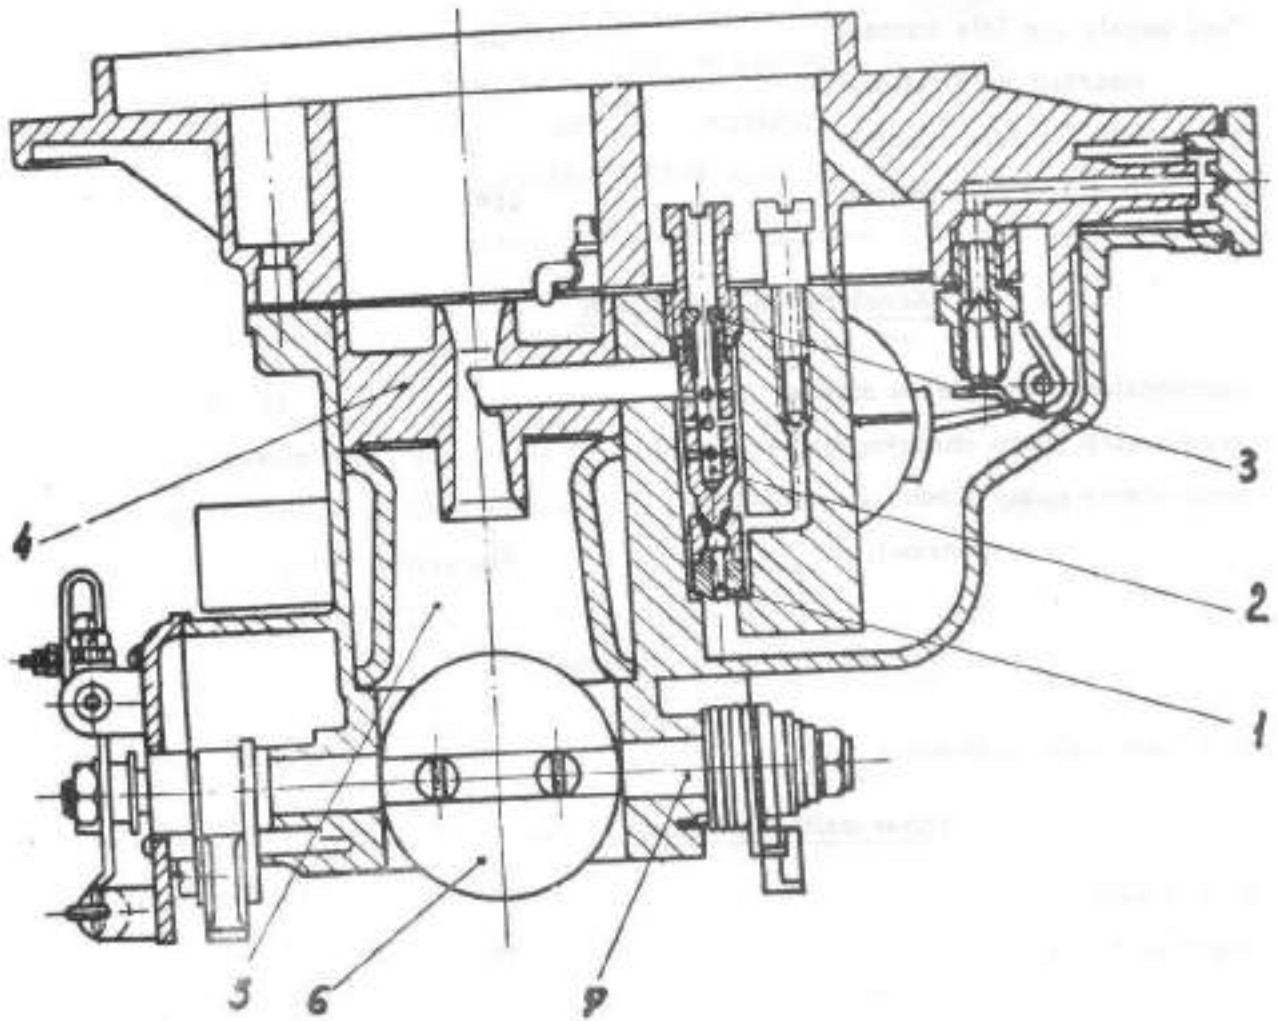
CROSS SECTION OF CARBURETTOR.
